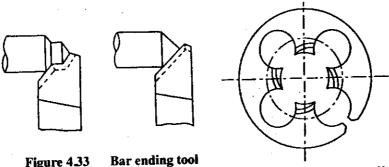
Bar ending tool A. Form ending tool, B. Chamfering tool
